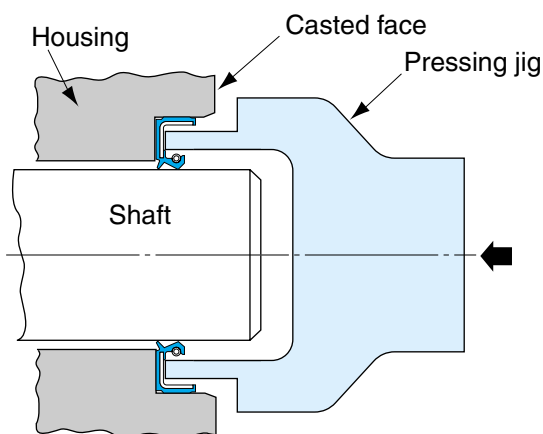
Seal press-fitting jig for shouldered housing bore
